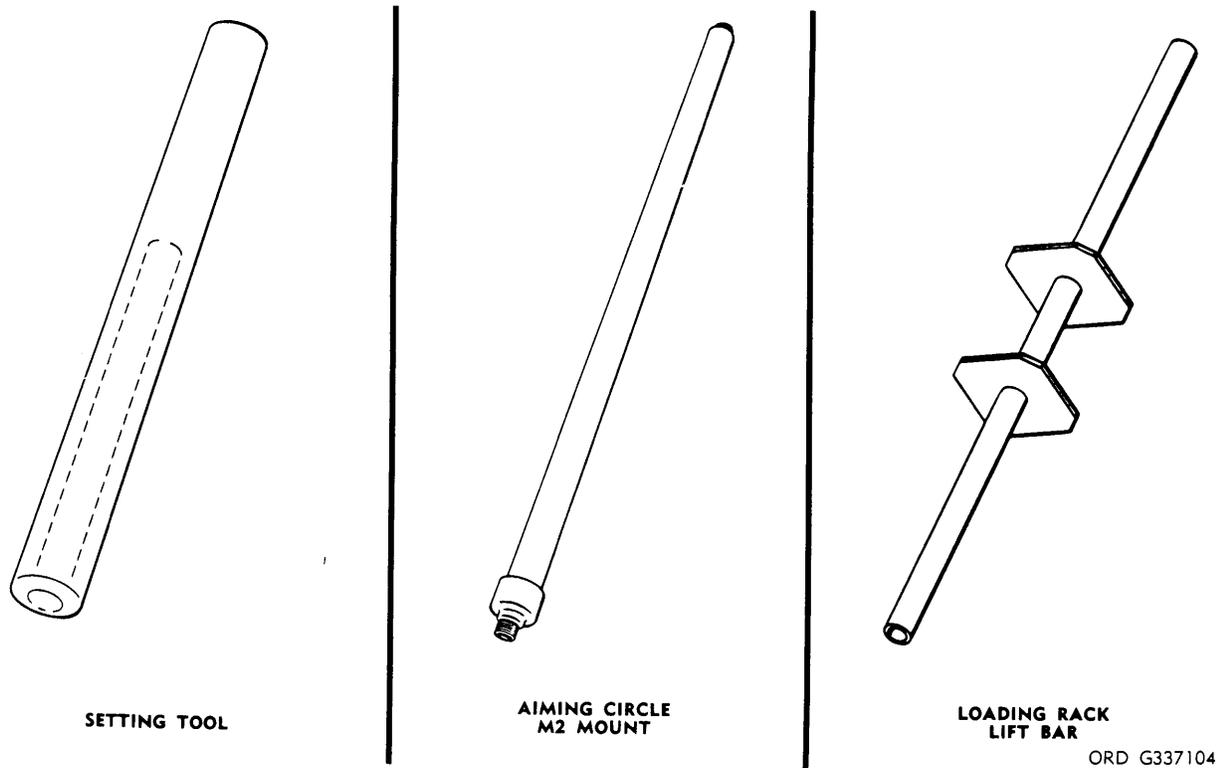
Special tools and equipment required for assembly and emplacement of the launching set.
